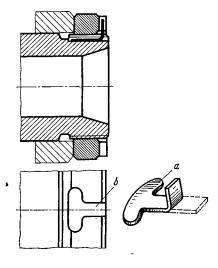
Circular nut with end-face slots locked by T-shape sheet-metal strip
